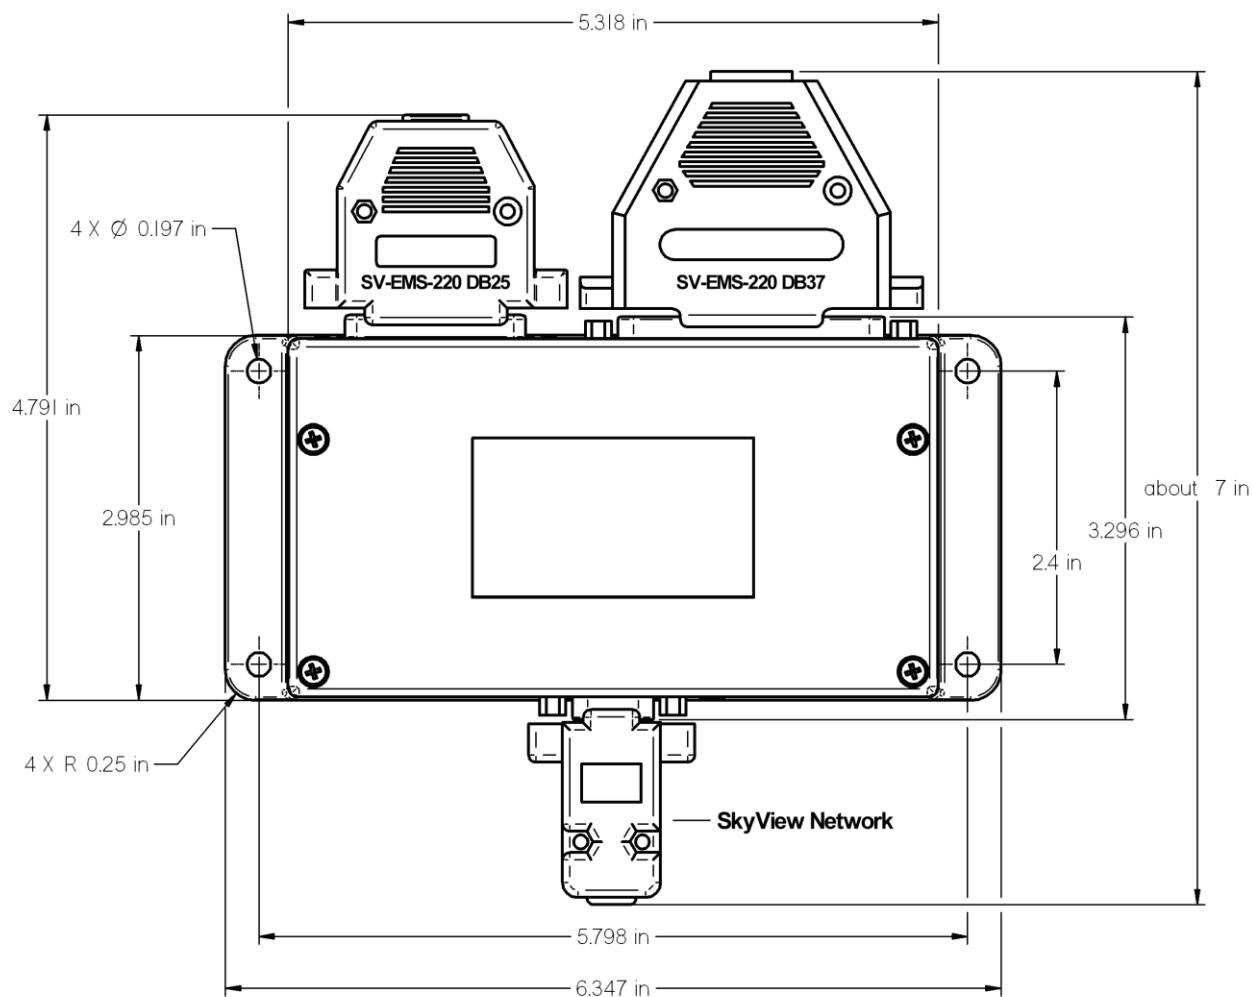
SV-EMS-220/221 Mounting Dimensions with Electronic Connections
